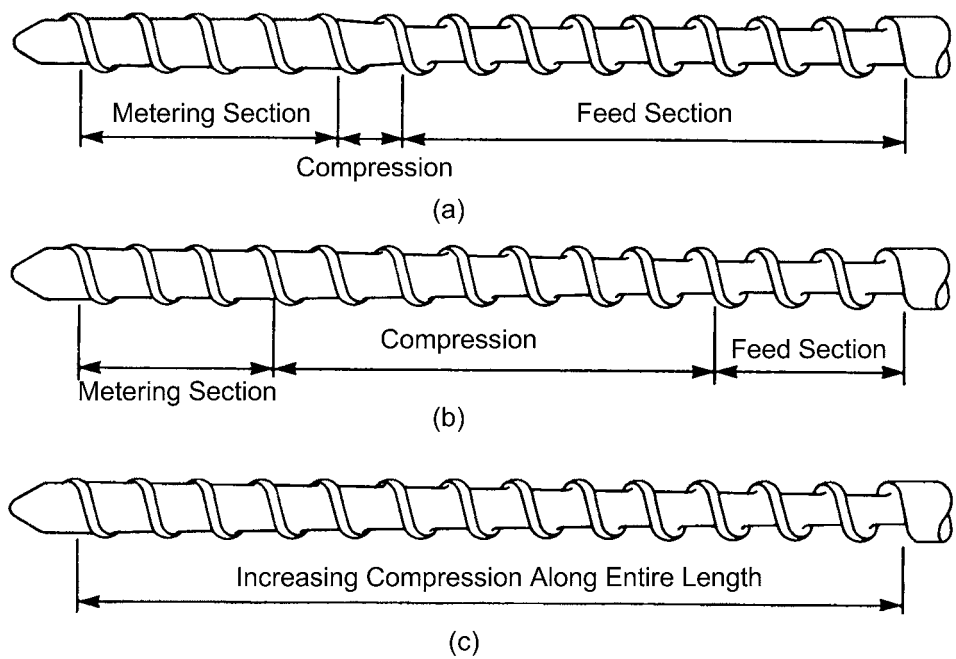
Injection molding screw designs. Source: Ref 11
